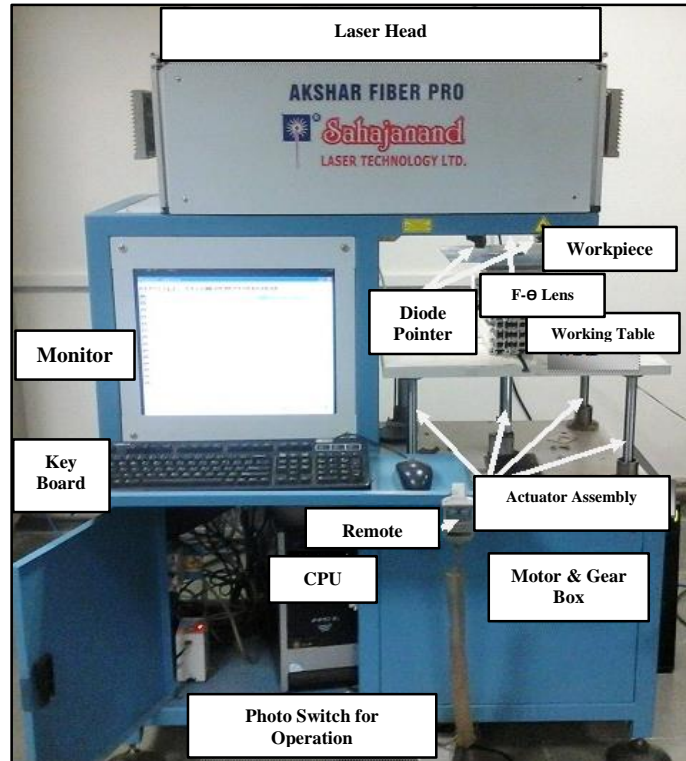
Photographic view of Galvanometer fiber laser machining experimental setup [10]
